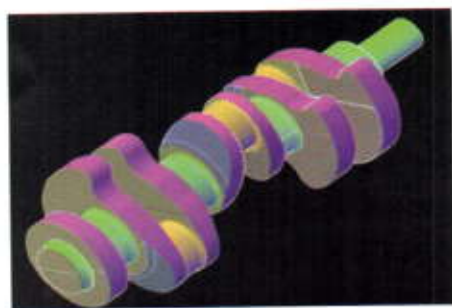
Solid model of the crankshaft of 3 cylinder 35hp tractor engine
